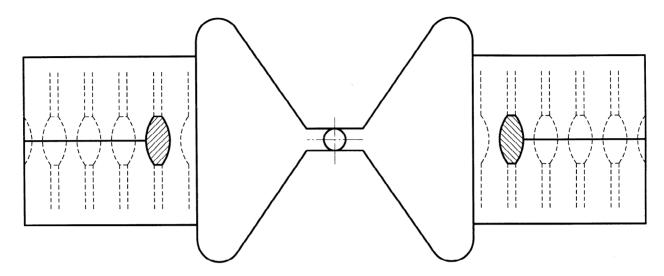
Moulding produced using single inserts (hatched), showing the locations from where tensile specimens can be taken (dashed lines)
